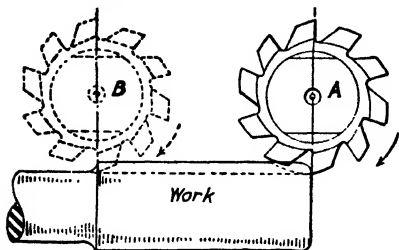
A*, cutting full depth of groove; *B*, end of cut. The feed trip should be set to operate when the axis of the cutter is directly over the shoulder.
